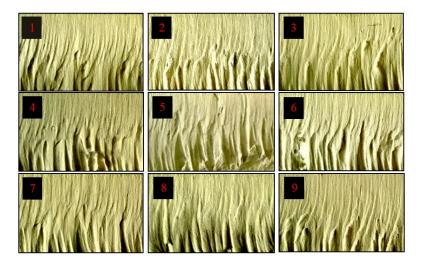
Cutting surfaces of the workpieces subjected to two-pass cutting for each test.
